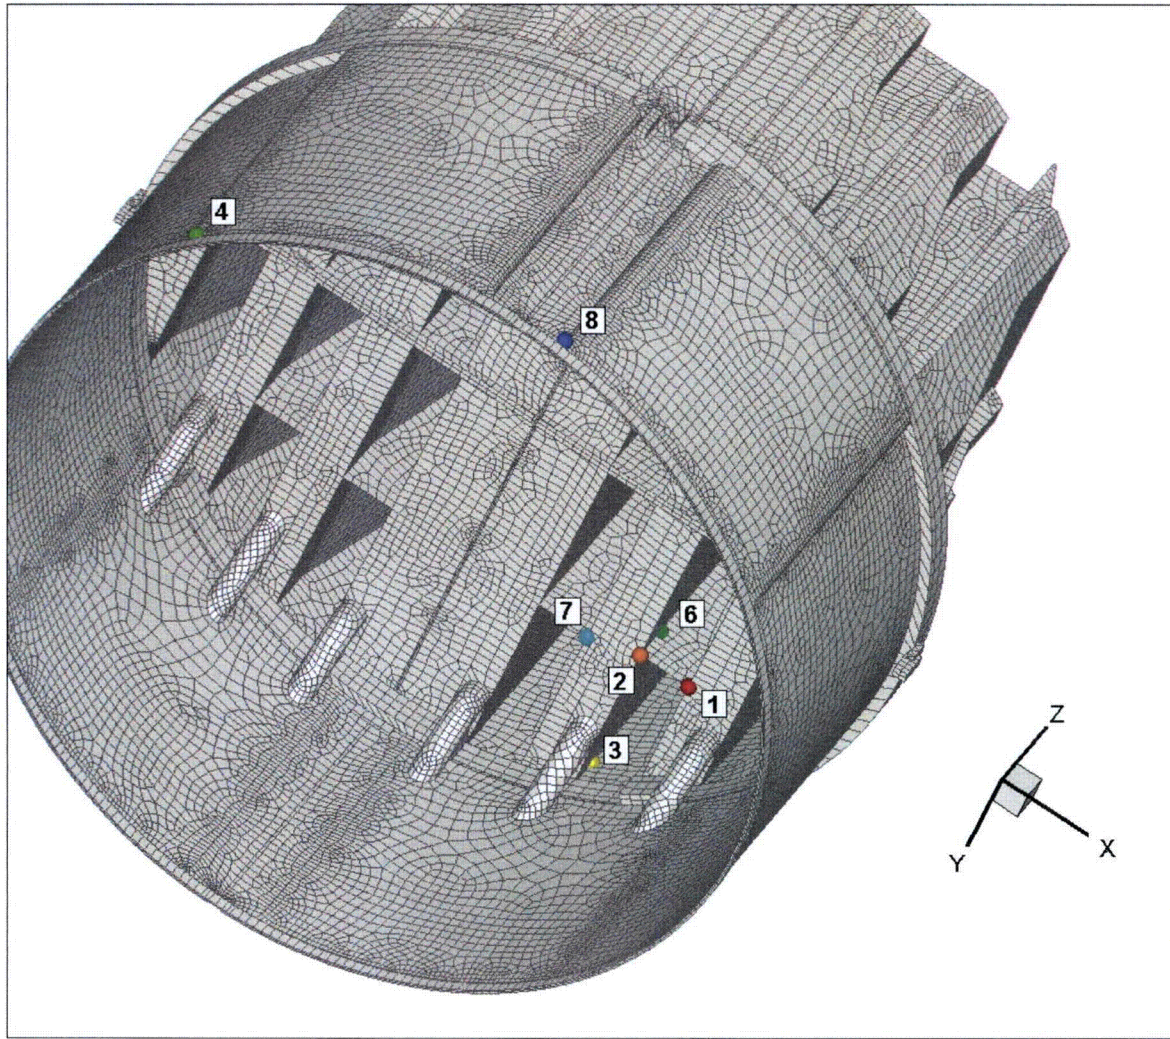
Locations of minimum alternating stress ratios, SR-a, at welds for CLTP operation with -10% frequency shift. Numbers refer to the enumerated locations for SR-a values at welds in Table 8c. This view shows locations 1- 4 and 6-8.
